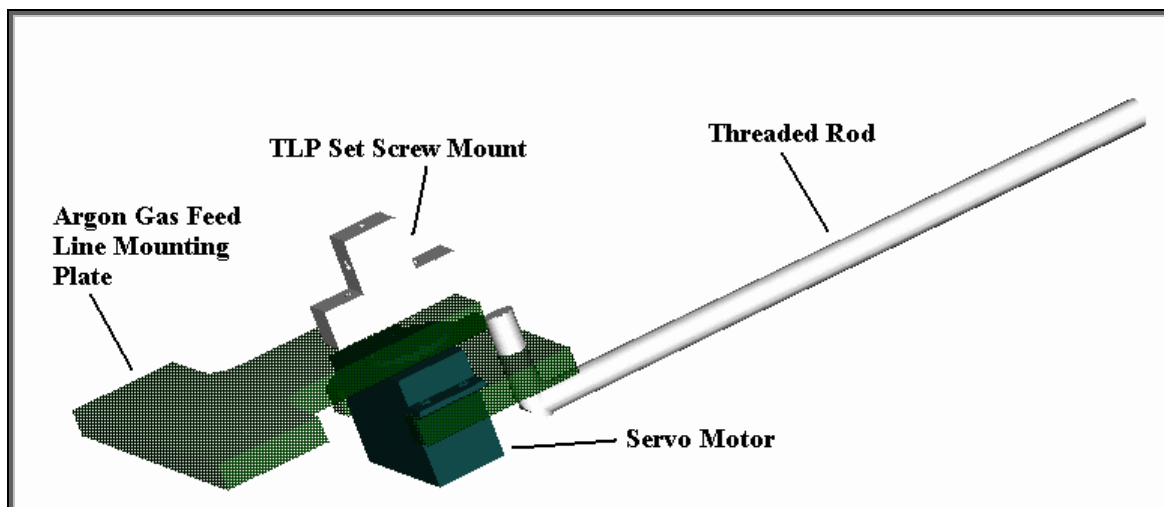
Probe mount showing glow cleaning electrode and servo motor for probe axis rotation.
